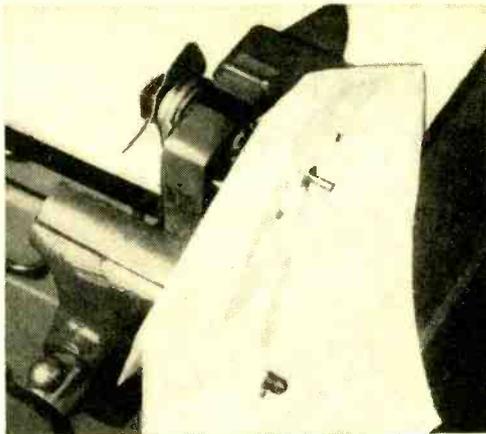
In vise, sheet hung over mounting plate protects motor bearings from filings.
